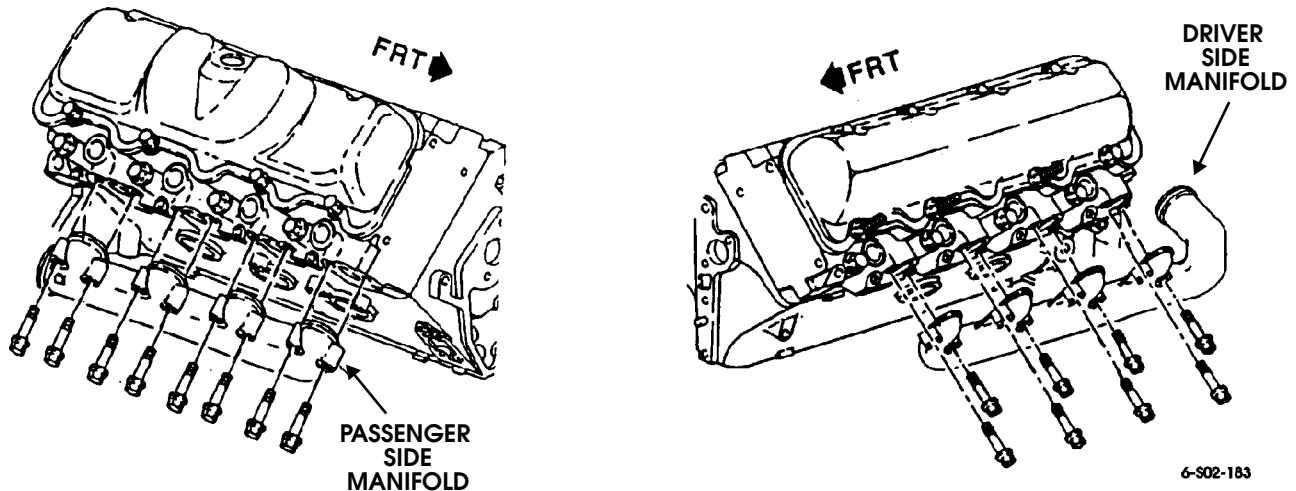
Exhaust Manifold Attachment (Turbo Diesel)
